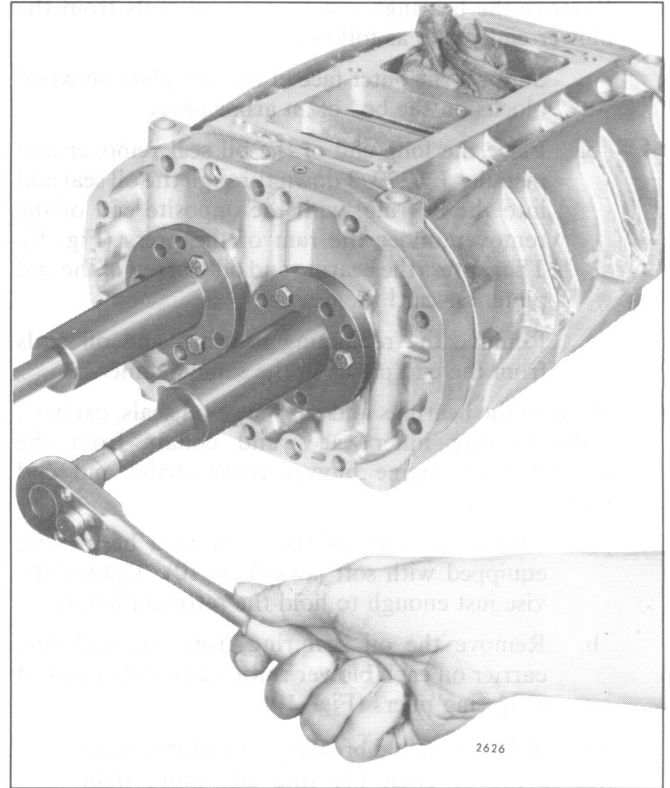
Removing Blower End Plate and Bearings from Housing and Rotors with Tool J 6270-31
